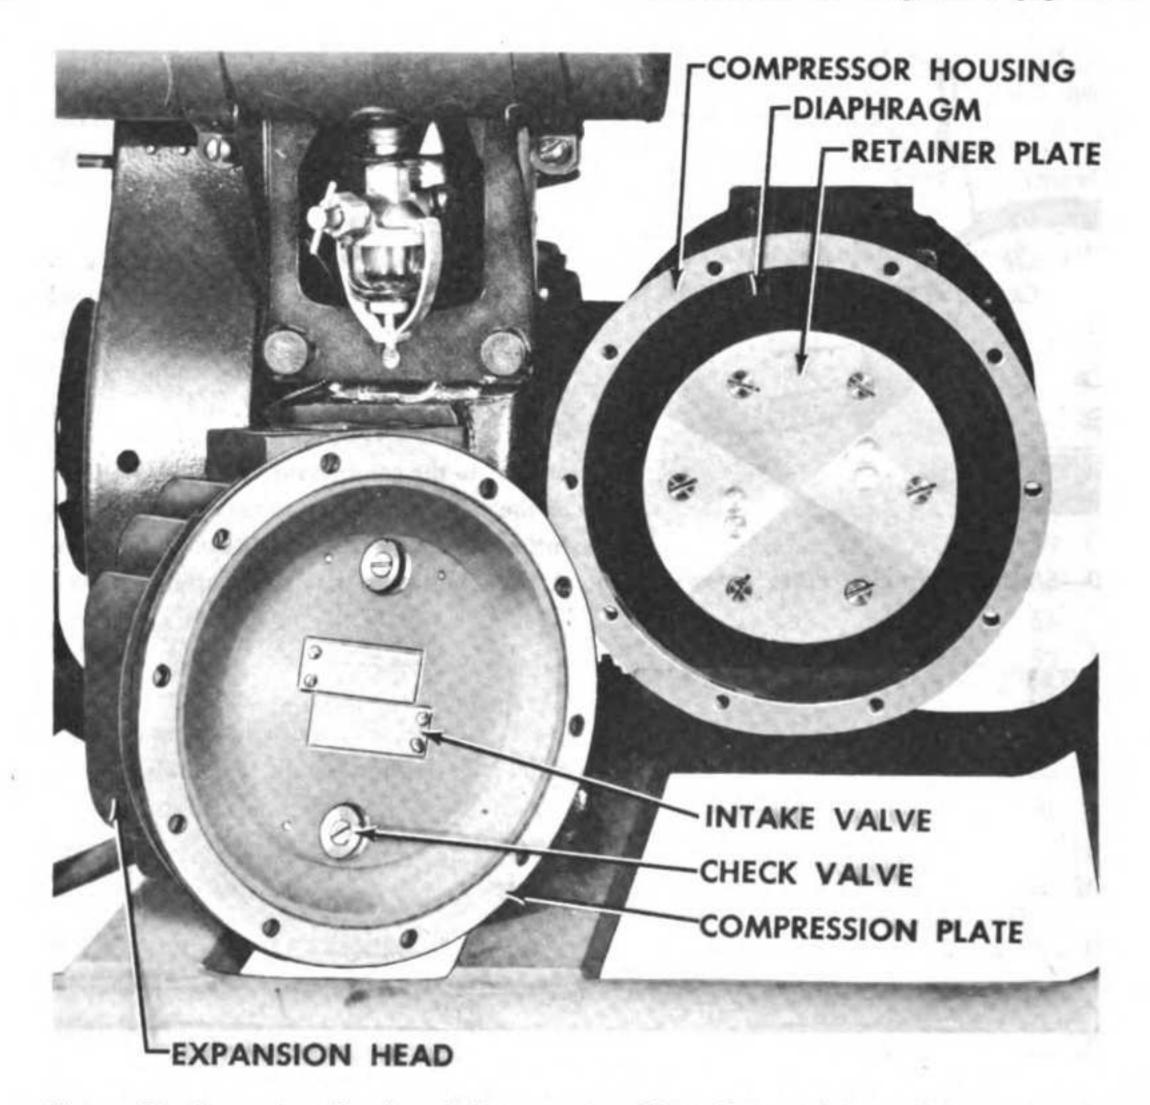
Expansion Head and Compression Plate Removed from Compressor Housing
